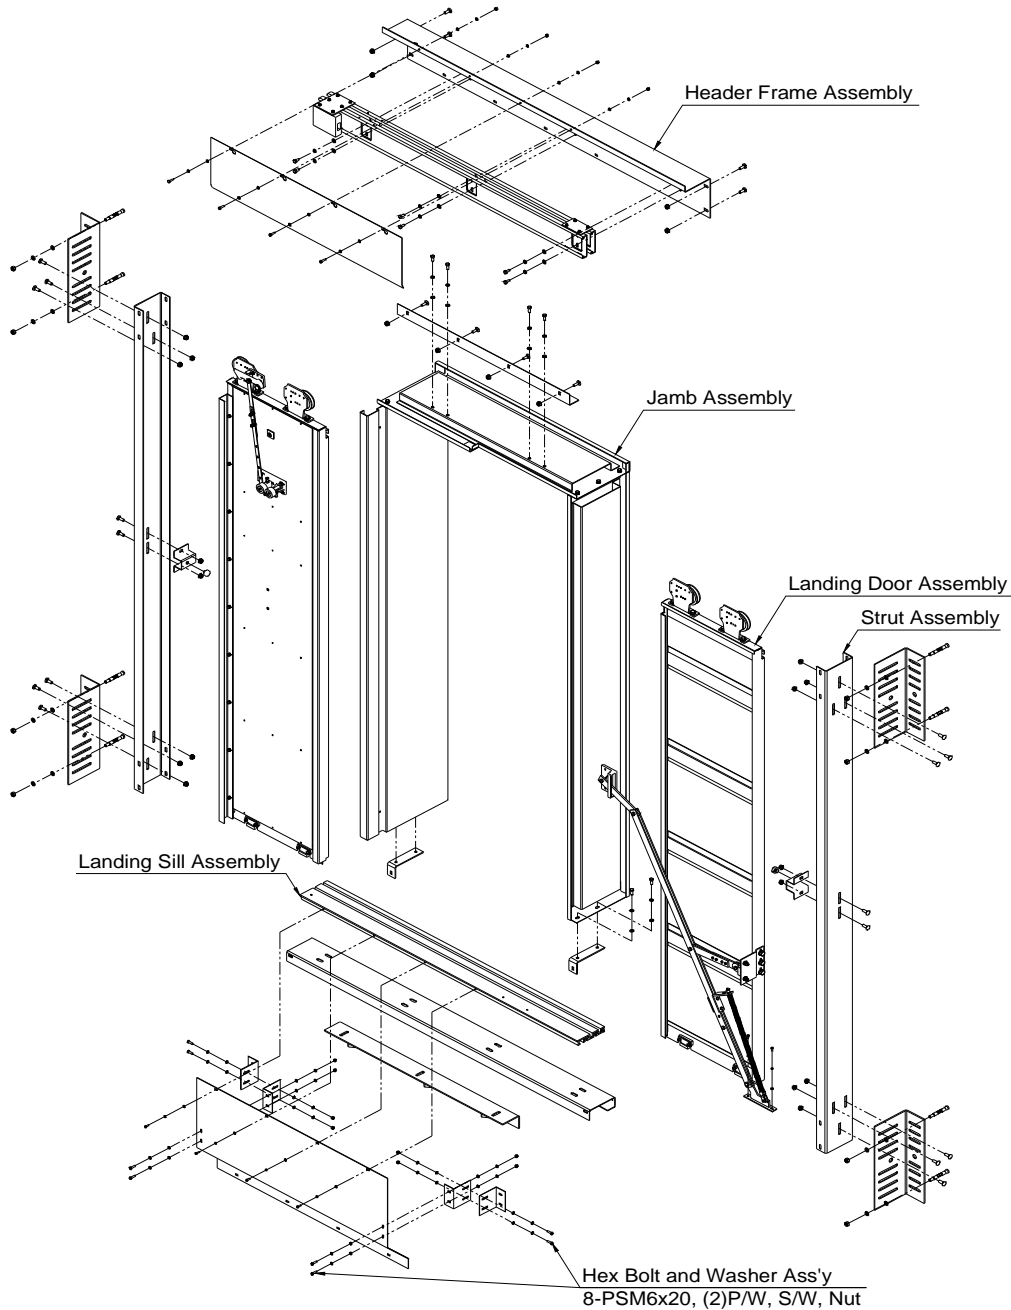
LANDING DOOR ASSEMBLY (C.P)
